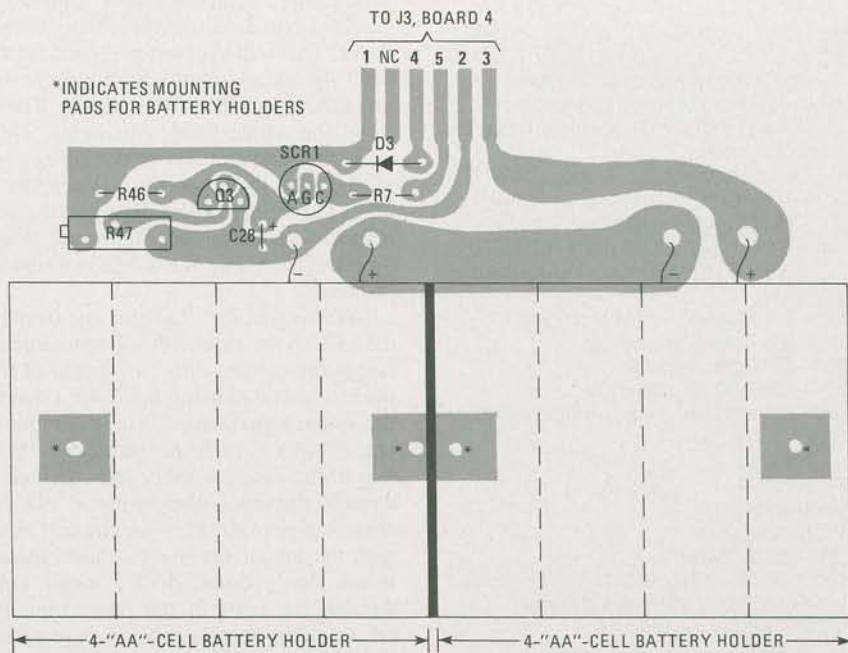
THE BATTERY HOLDERS are mounted to the pads indicated by asterisks in this parts-placement diagram for board 3.
